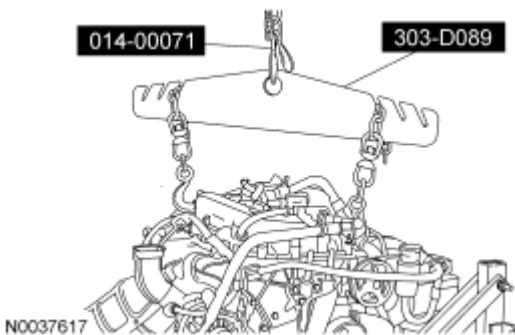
Identifying Special Tools (014-00071, 303-D089)
